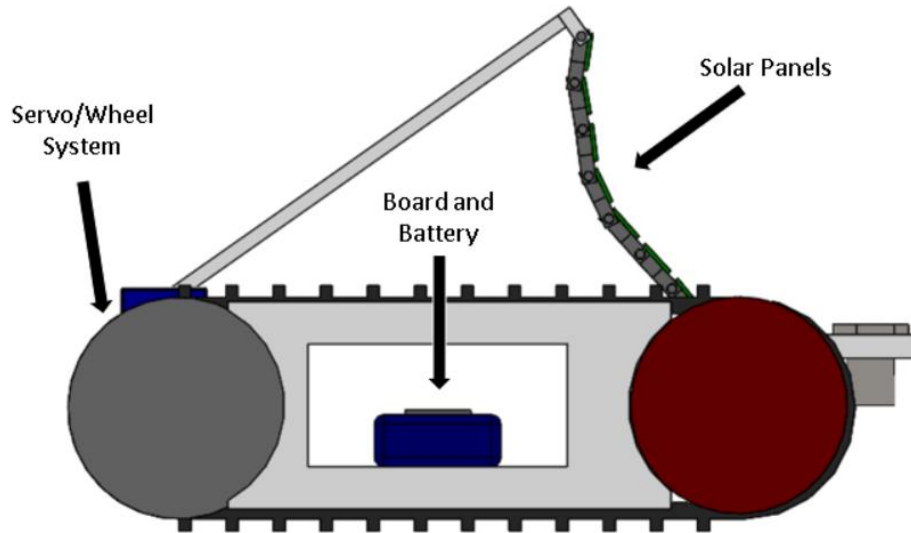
Side View of Current Rover Model – Main Body Interior
